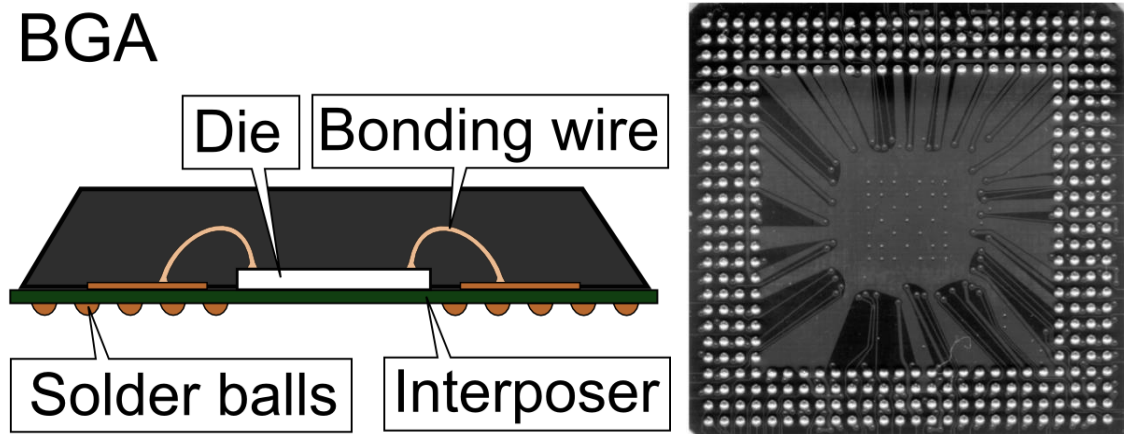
Left, Cut-away side view of a BGA package showing the internal die and wire connections. Source: Tosaka. Right, view of the underside of a BGA package. The array of gray solder balls is clearly seen (Source: Texas Instruments).
